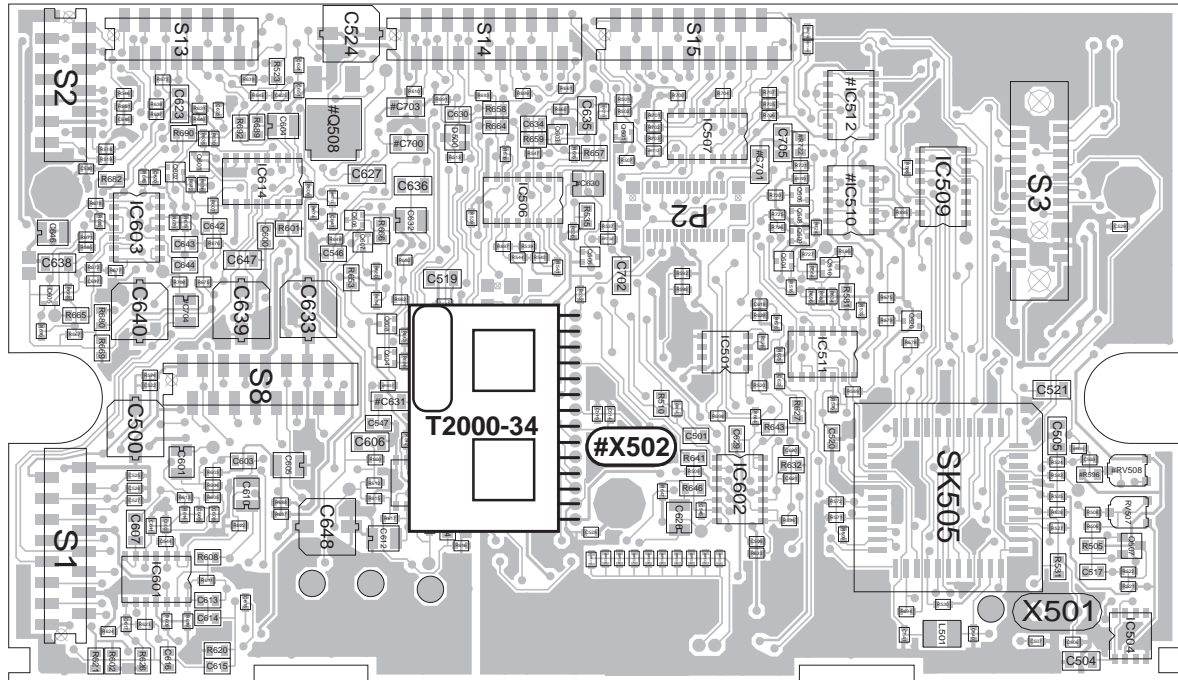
T2000-34 Selcall PCB Mounting - T2010 & T2015 Logic PCB (top side)
